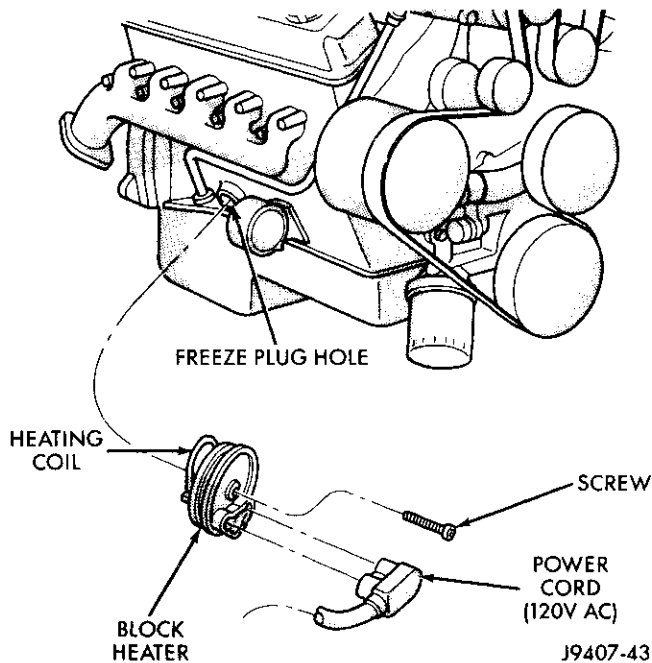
Engine Block Heater—8.0L V-10 Engine
